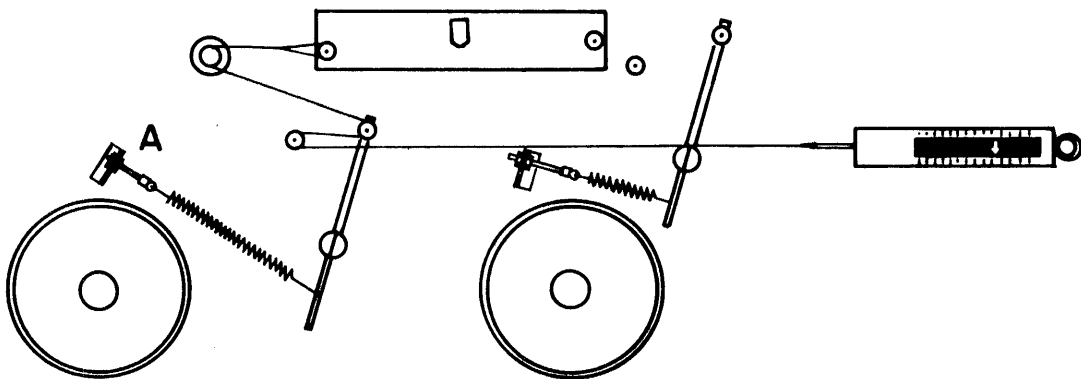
TAKE-UP TENSION ARM GUIDE ADJUSTMENT
